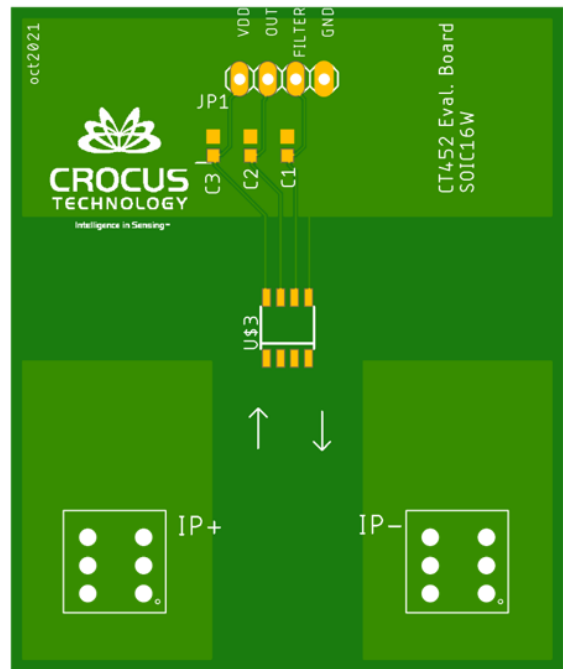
Recommended PCB Layout (Top Layer) for CT453
